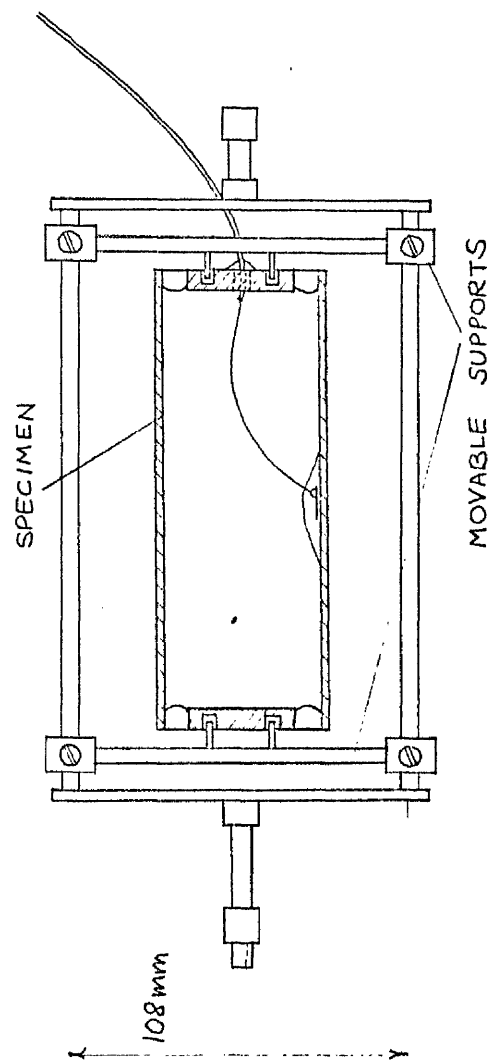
COMPLETE ASSEMBLY , EXTERNAL LAYER REMOVAL.
